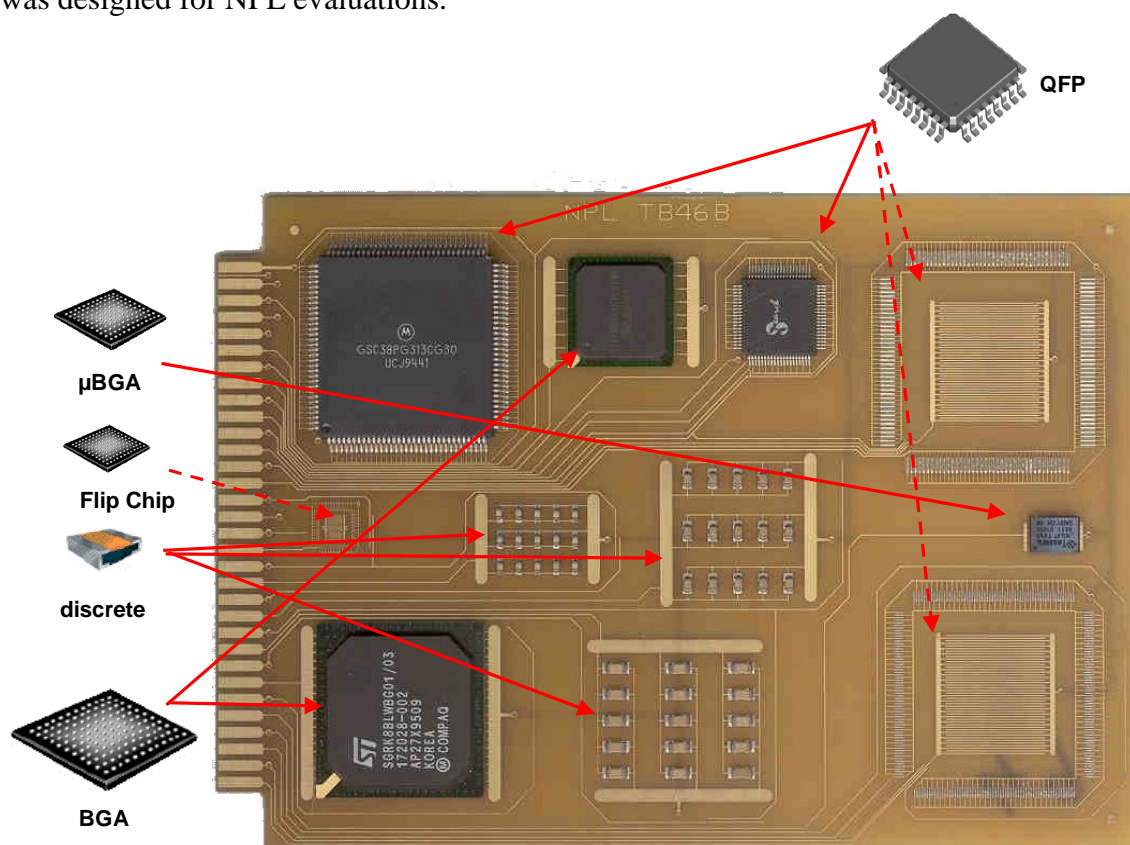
SIR Process Validation Test Board TB46 – Surface Mount Demonstrator
